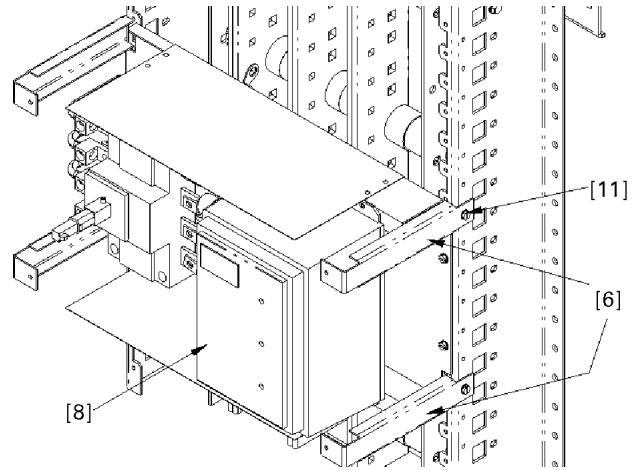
Filler supports for 27 and 31 wide panelboards or 35 wide switchboards.
